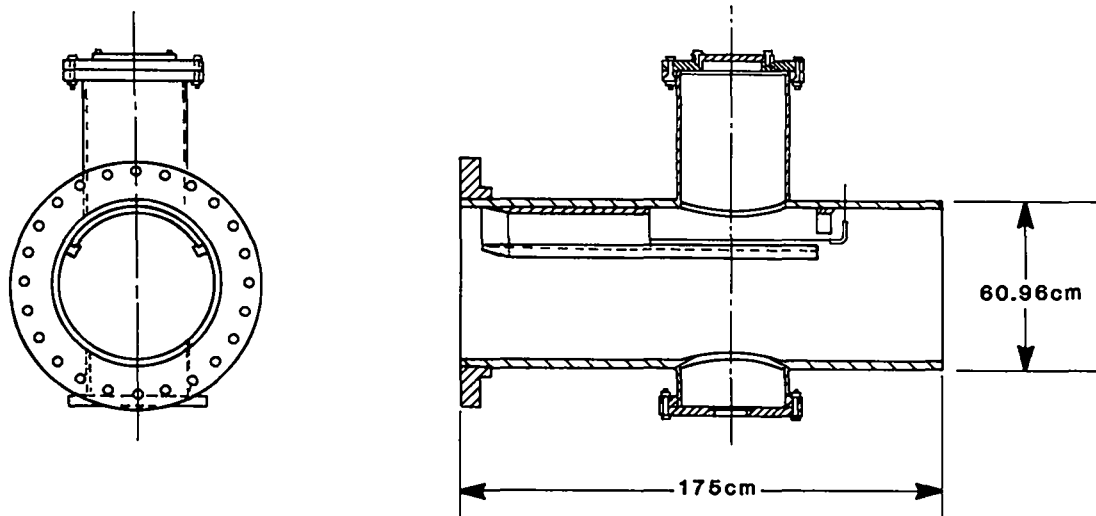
The test assembly was contained in a seamless steel (ASTM 53-Grade B) test section bolted to the main shock tube.
